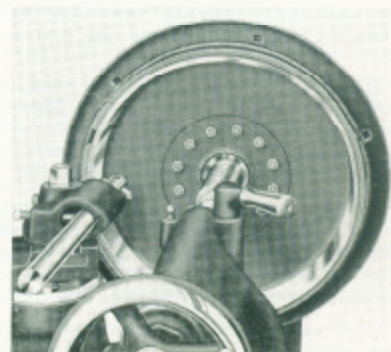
A Lincoln brake drum being trued by turning in the lathe. Although the steel is a little harder than the average, the drum is turned easily on the South Bend Brake Drum Lathe. For instructions on how to handle hard drums see Auto Mechanics Service Book No. 66.
